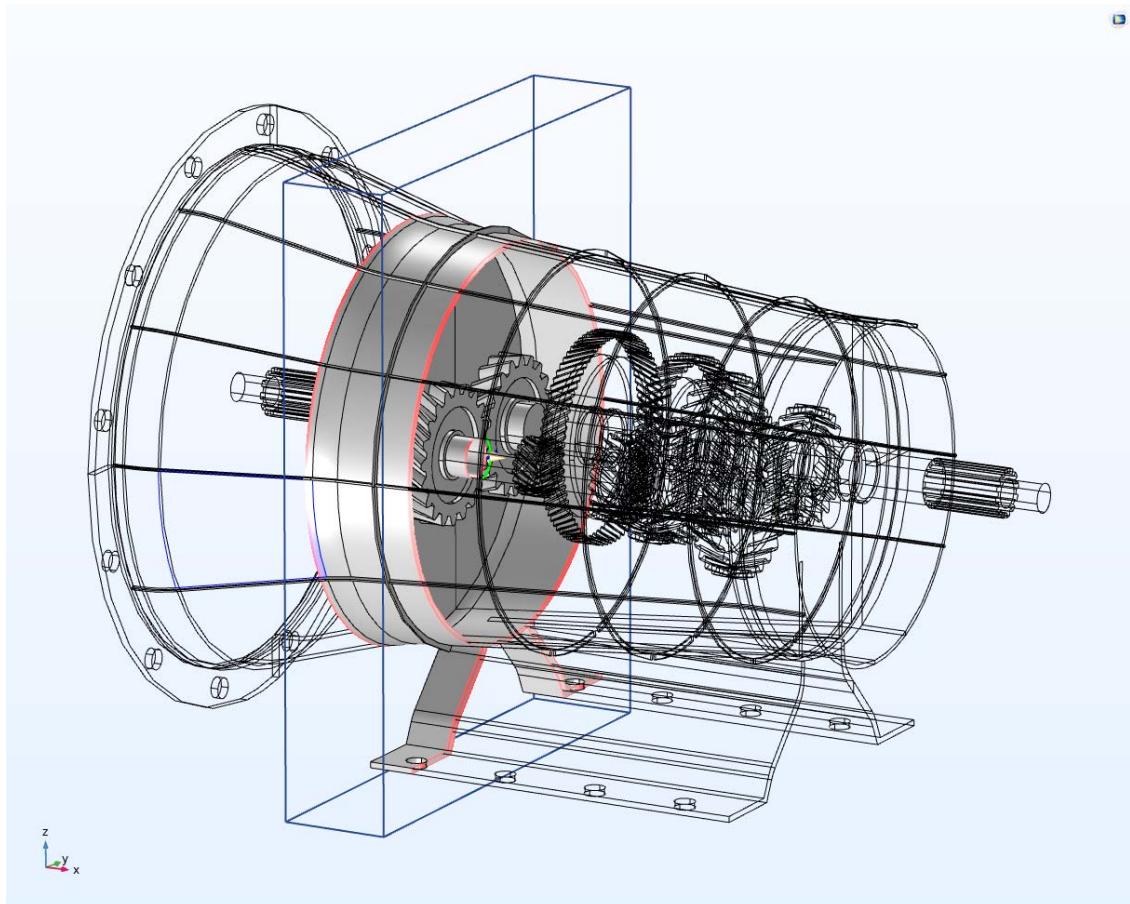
A Clip Box tool removes parts of the geometry from the view.
